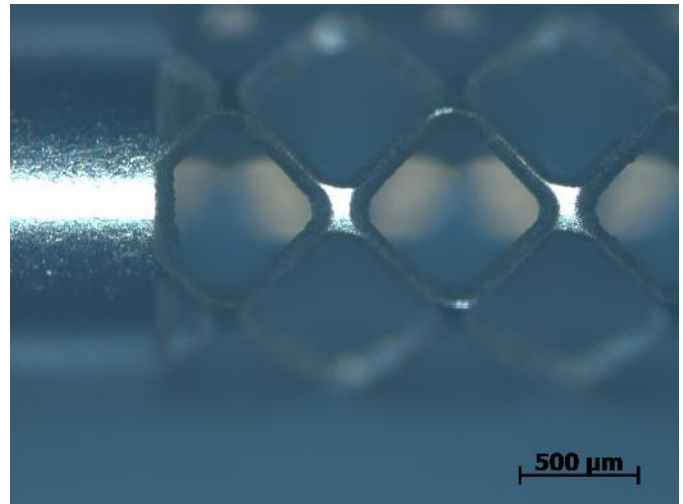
Diamond pattern machined on a stainless steel tube AISI 304 by means of a synchronized galvanometric scanner and rotary axis
